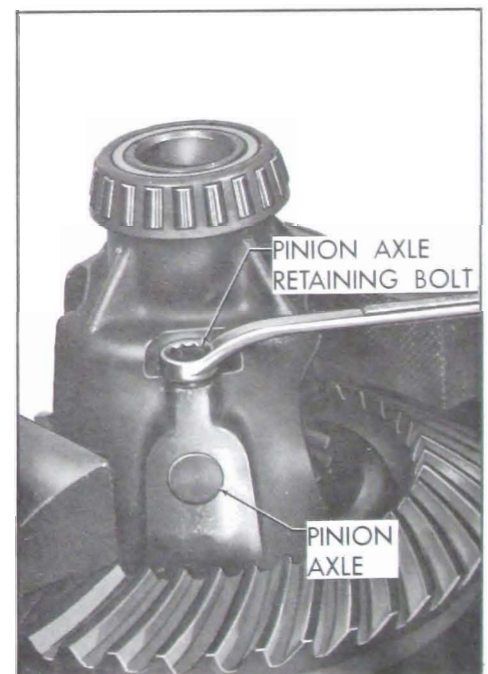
Removing Pinion Axle Retaining Bolt
